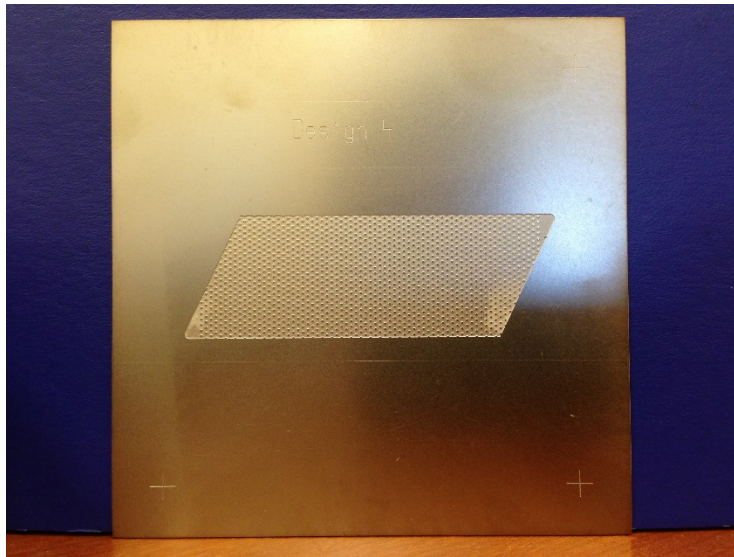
Example of a master plate fabricated by Great Lakes Engineering.
